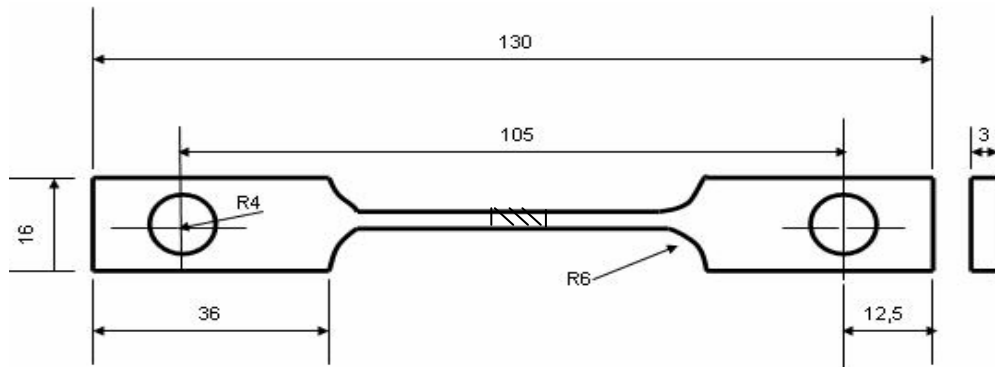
Design of the smooth tensile specimen used in SCC tests. Units: mm.
